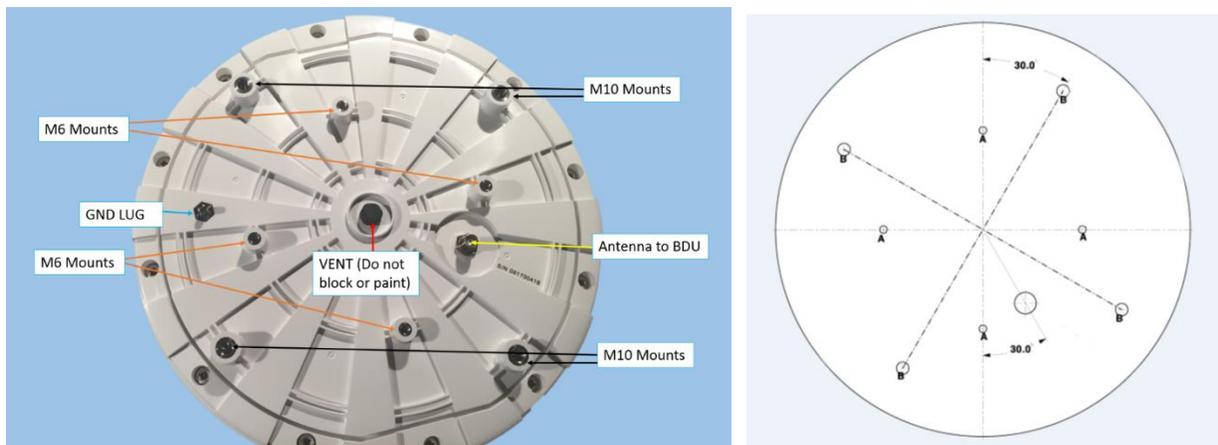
Mounting Holes in Bottom of Antenna and Mounting Template (Included In Kit)
